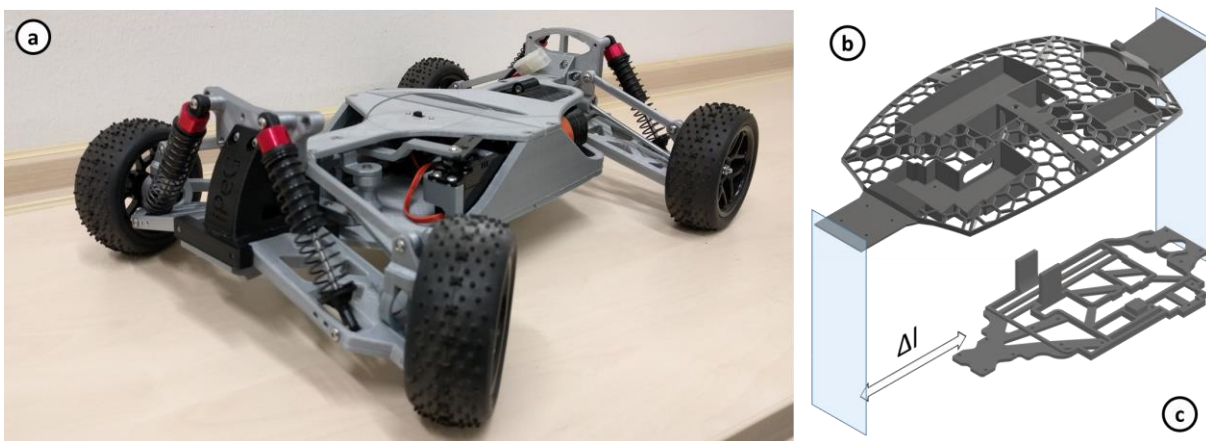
Example of a final RC-vehicle a) assembled standard model b) force flow adapted/ bionic chassis c) chassis with maximum material saving and smallest possible size
